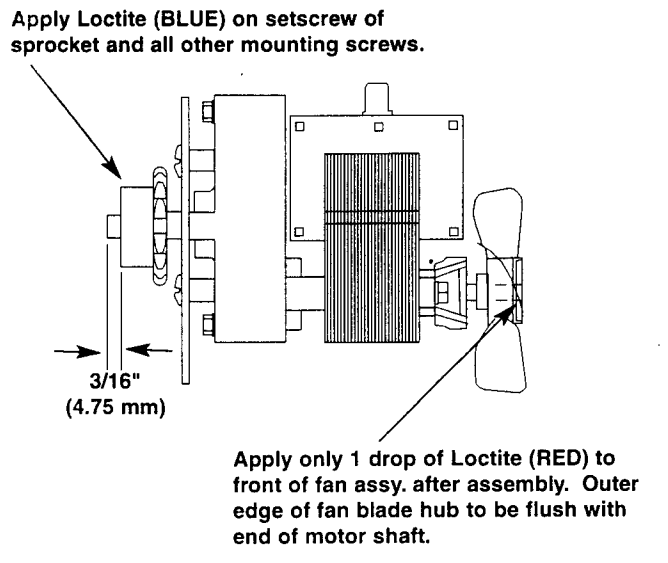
Conveyor Motor Sprocket and Fan Assembly Instructions
